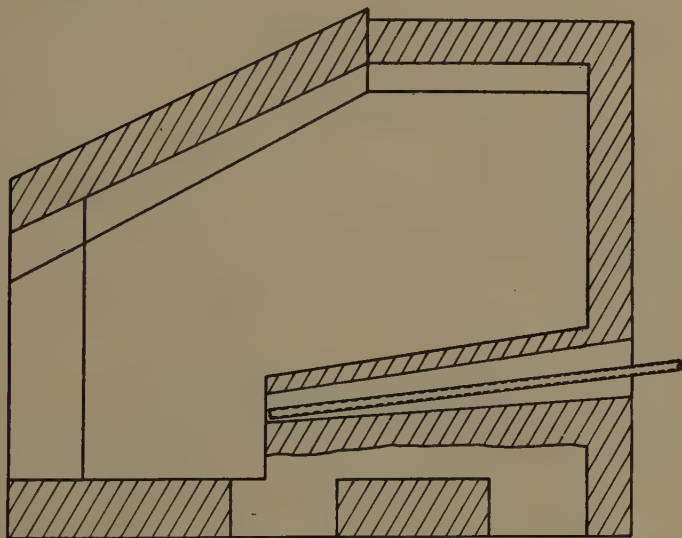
Oil burner in brick tunnel through end of open-hearth furnace.
